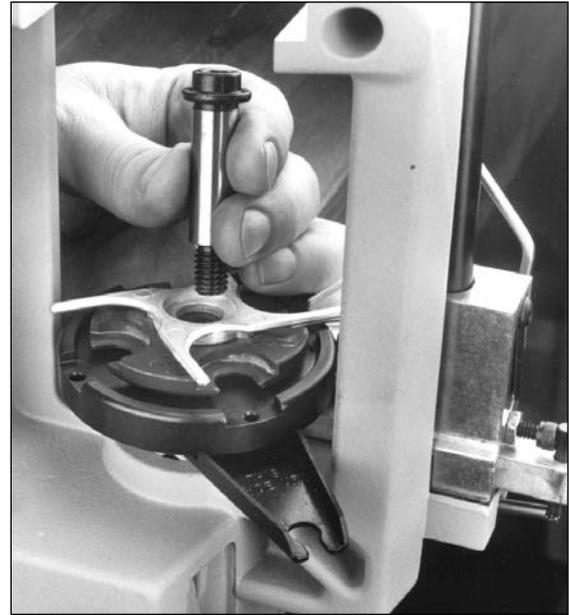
Inserting the shellplate bolt, first through the index sprocket then the shellplate.
